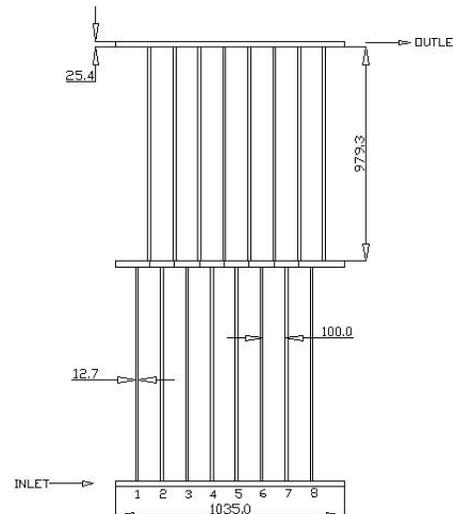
Sectional view of Zig-Zag arrangement of riser tubes.
